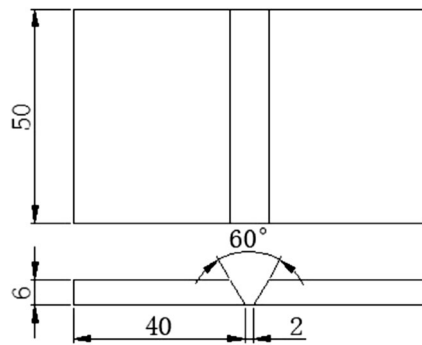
Schematic diagram of weld joint configuration (dimensions in mm)
